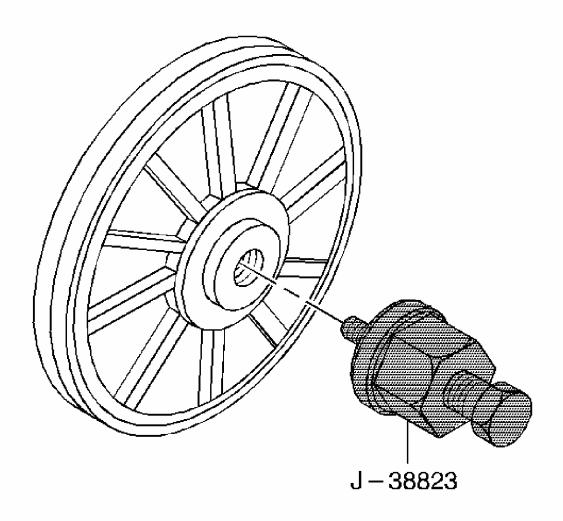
View of J 38823 Installing Water Pump Pulley Courtesy of GENERAL MOTORS CORP.
